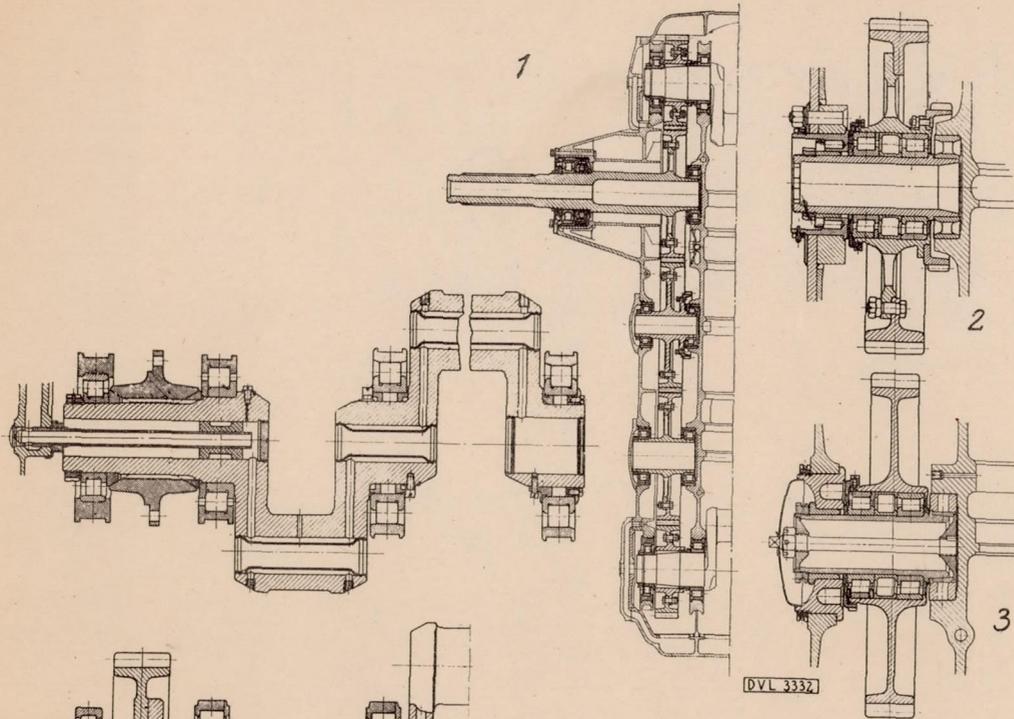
Driving gears of Jumo-4 Diesel engine.
